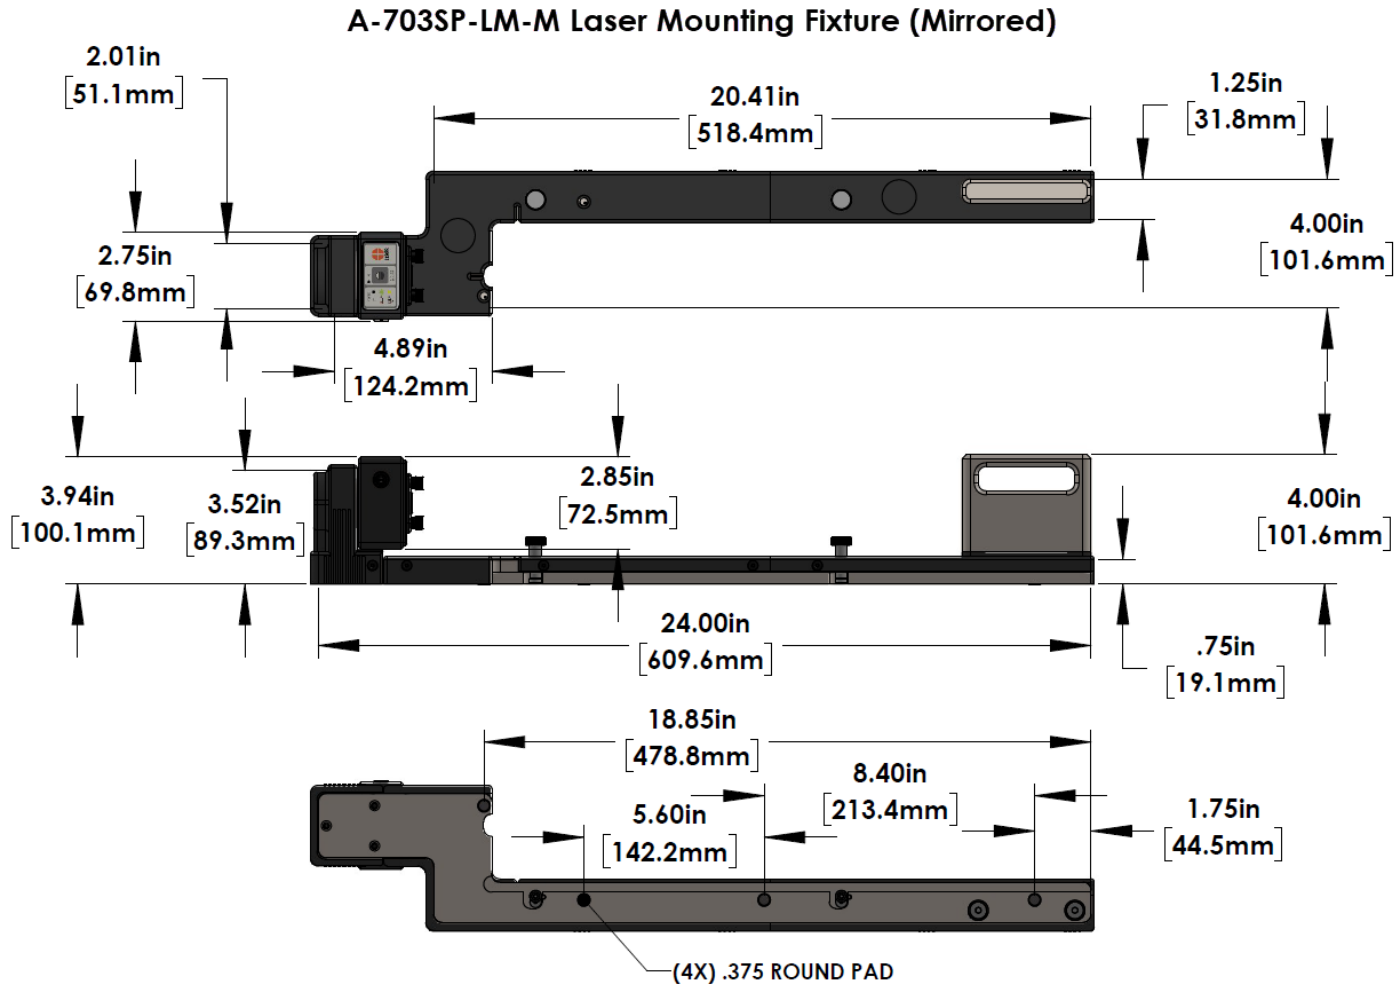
A-703SP-LM-M “Mirrored” Laser Mounting Fixture Dimensions
